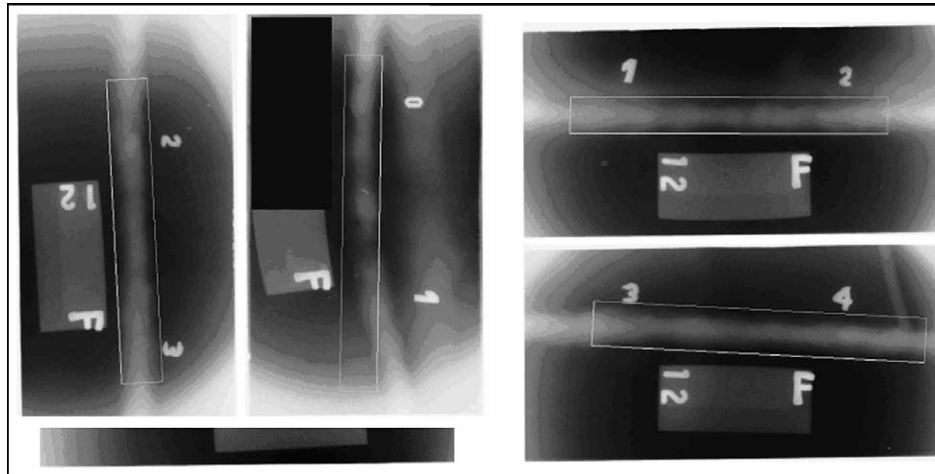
Image with 4 weld joint radiographs and results that were detected and recognized as weld beads.
